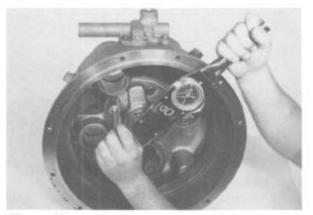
Install support washers and screws. Torque screws 57 to 63 ft.lbs. torque [77,3 - 85,4 N.m.].
